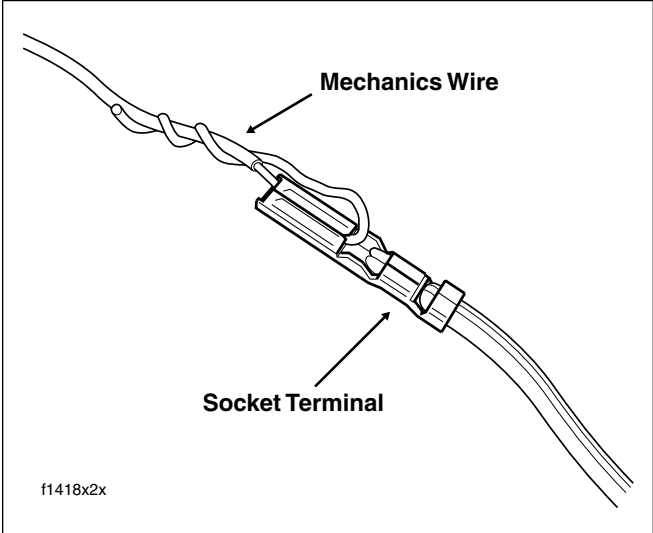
Fix Mechanics Wire to Socket Terminals
